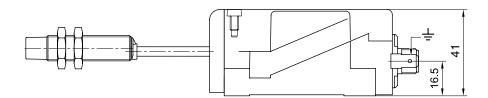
Processor BIS L-409-045-002-07-S4 (dimensions in mm)
